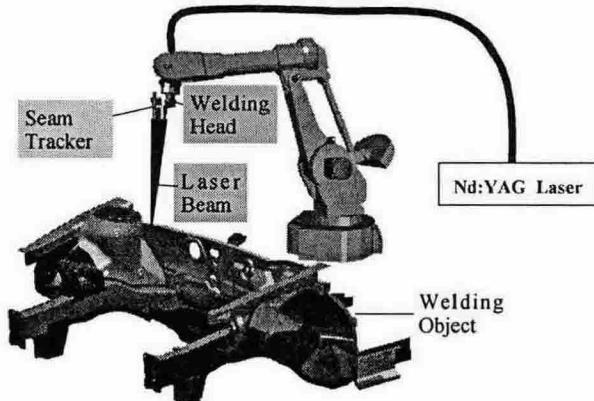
Concept drawing of 3-dimensional laser welding system
